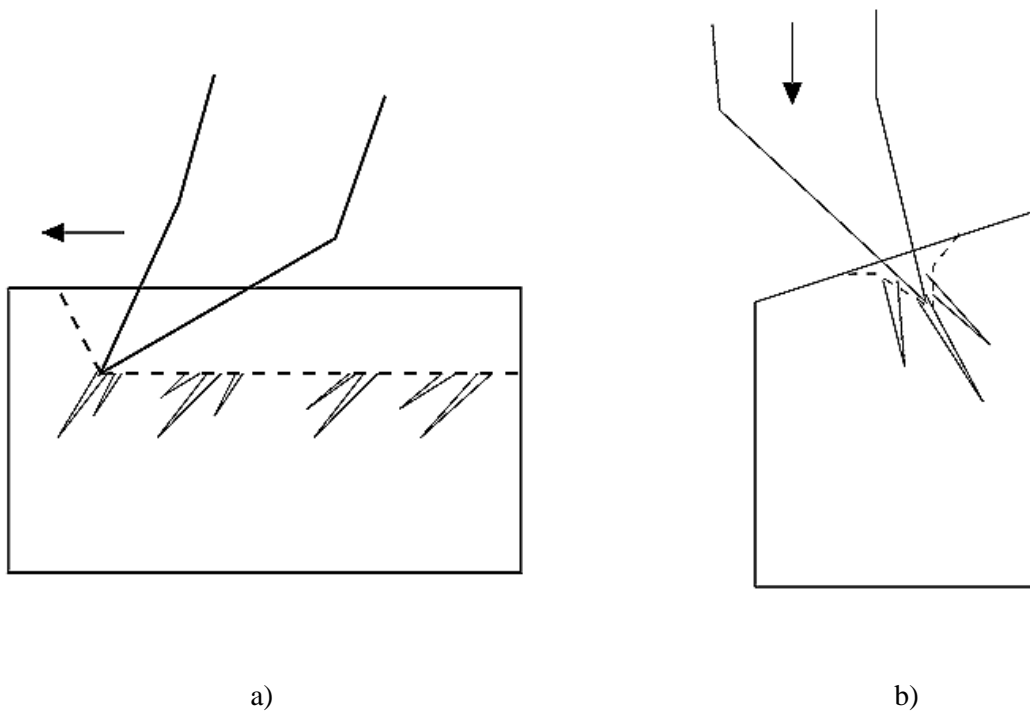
Cracks in glass in cutting (a) and in indentation of a cutter (b),
